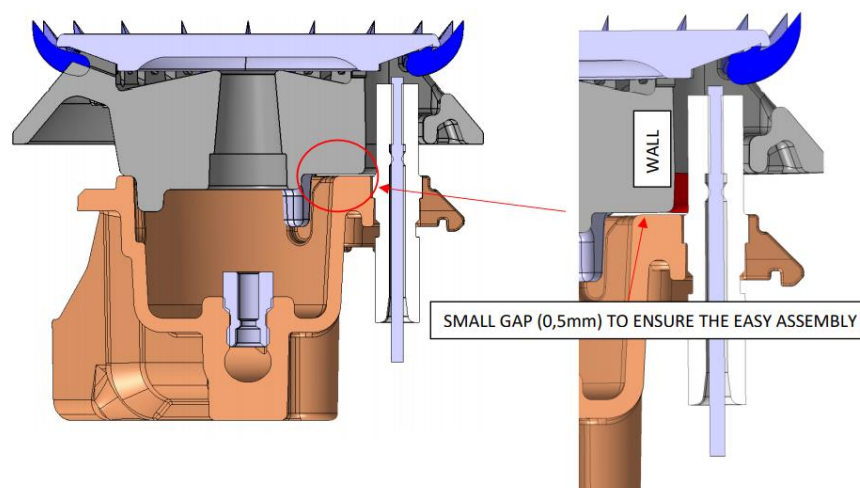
A cross section view and an enhanced view of an embodiment of the invention. The red arrows indicate a 0,5mm gap that complies with tolerance requirements for an easy burner assembly.
